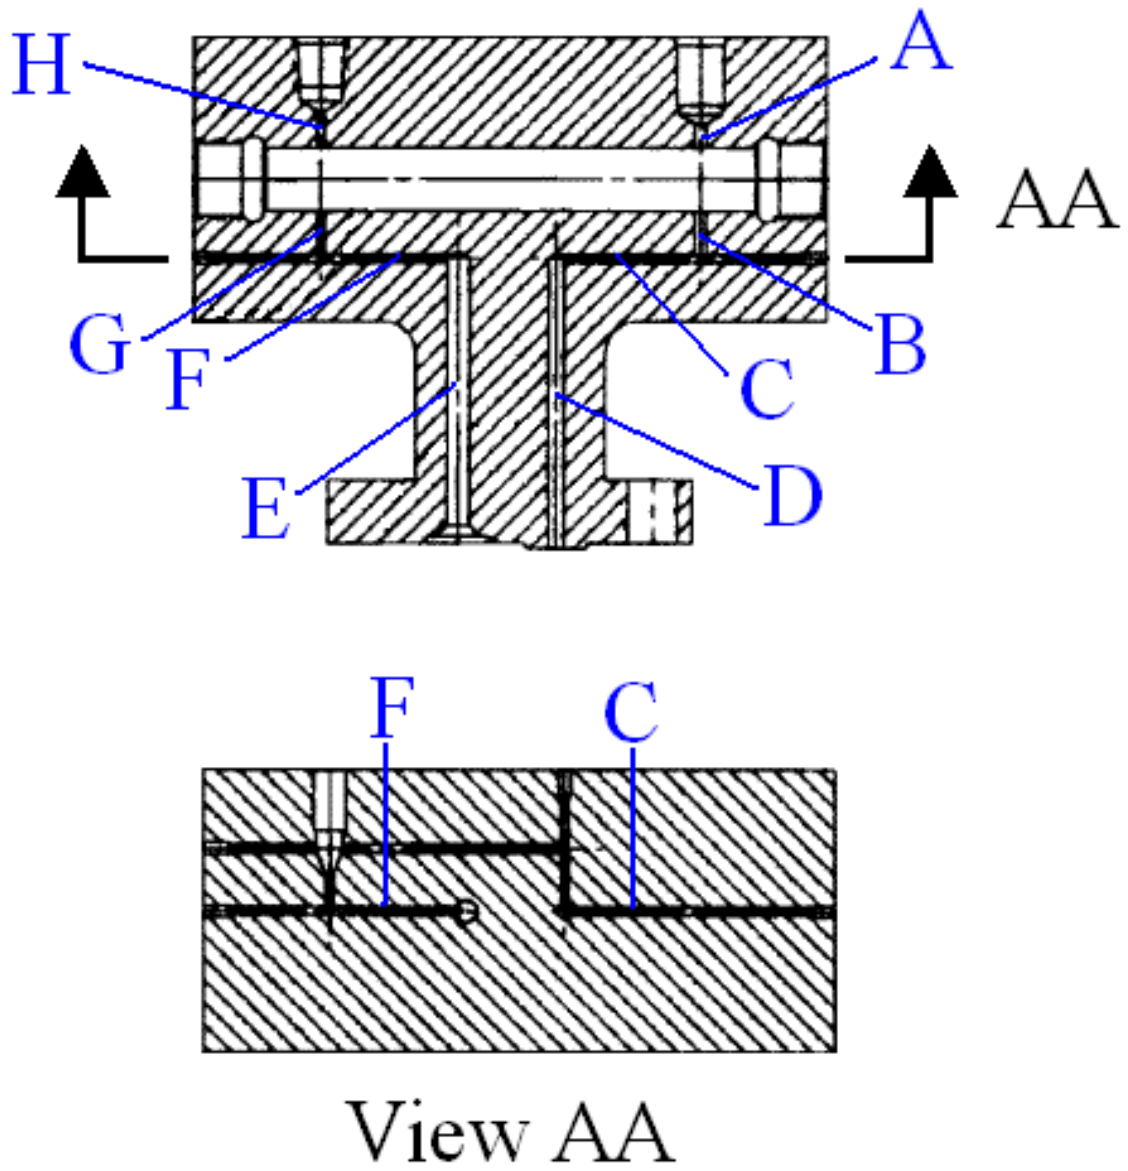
Cut-away drawing of the reduced-volume manifold.
